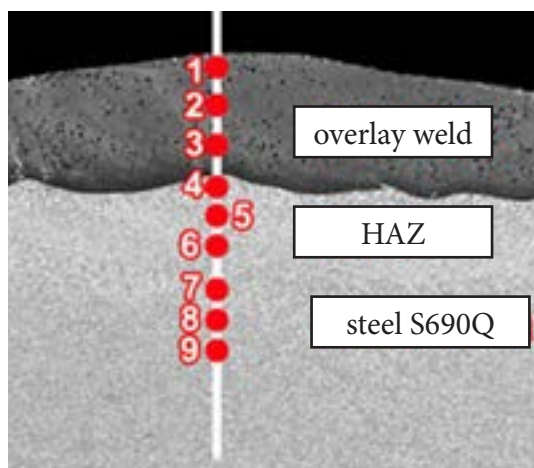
Measurement line and points used in the microhardness HV1 tests of overlay welds
